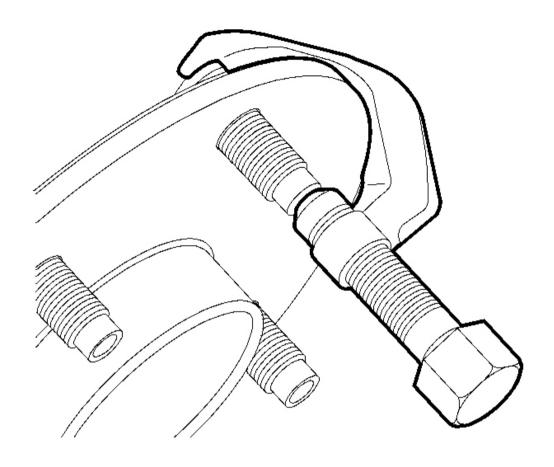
Wheel Stud & Wheel Bearing/Hub Assembly Courtesy of GENERAL MOTORS CORP.
